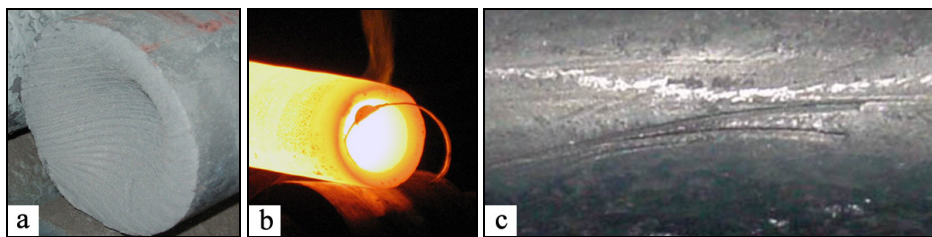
Formation of cavity on the workpiece (a), semi-ring on the rear end of cupped blank (b), pincher defect on the outer surface of the pipe (c)
